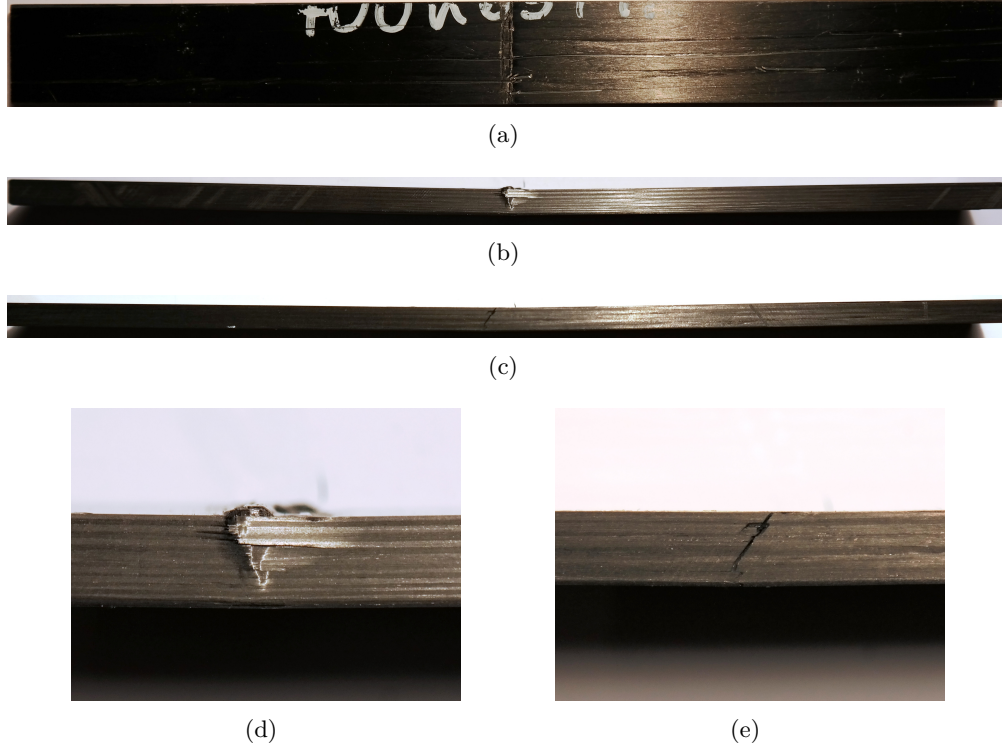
Failure of 3-point bending unidirectional 0° specimen: (a) initial geometry; (b) T800S/705; (c) K13916/705; (d) T800S/705 failure detail; (e) K13916/705 failure detail.
